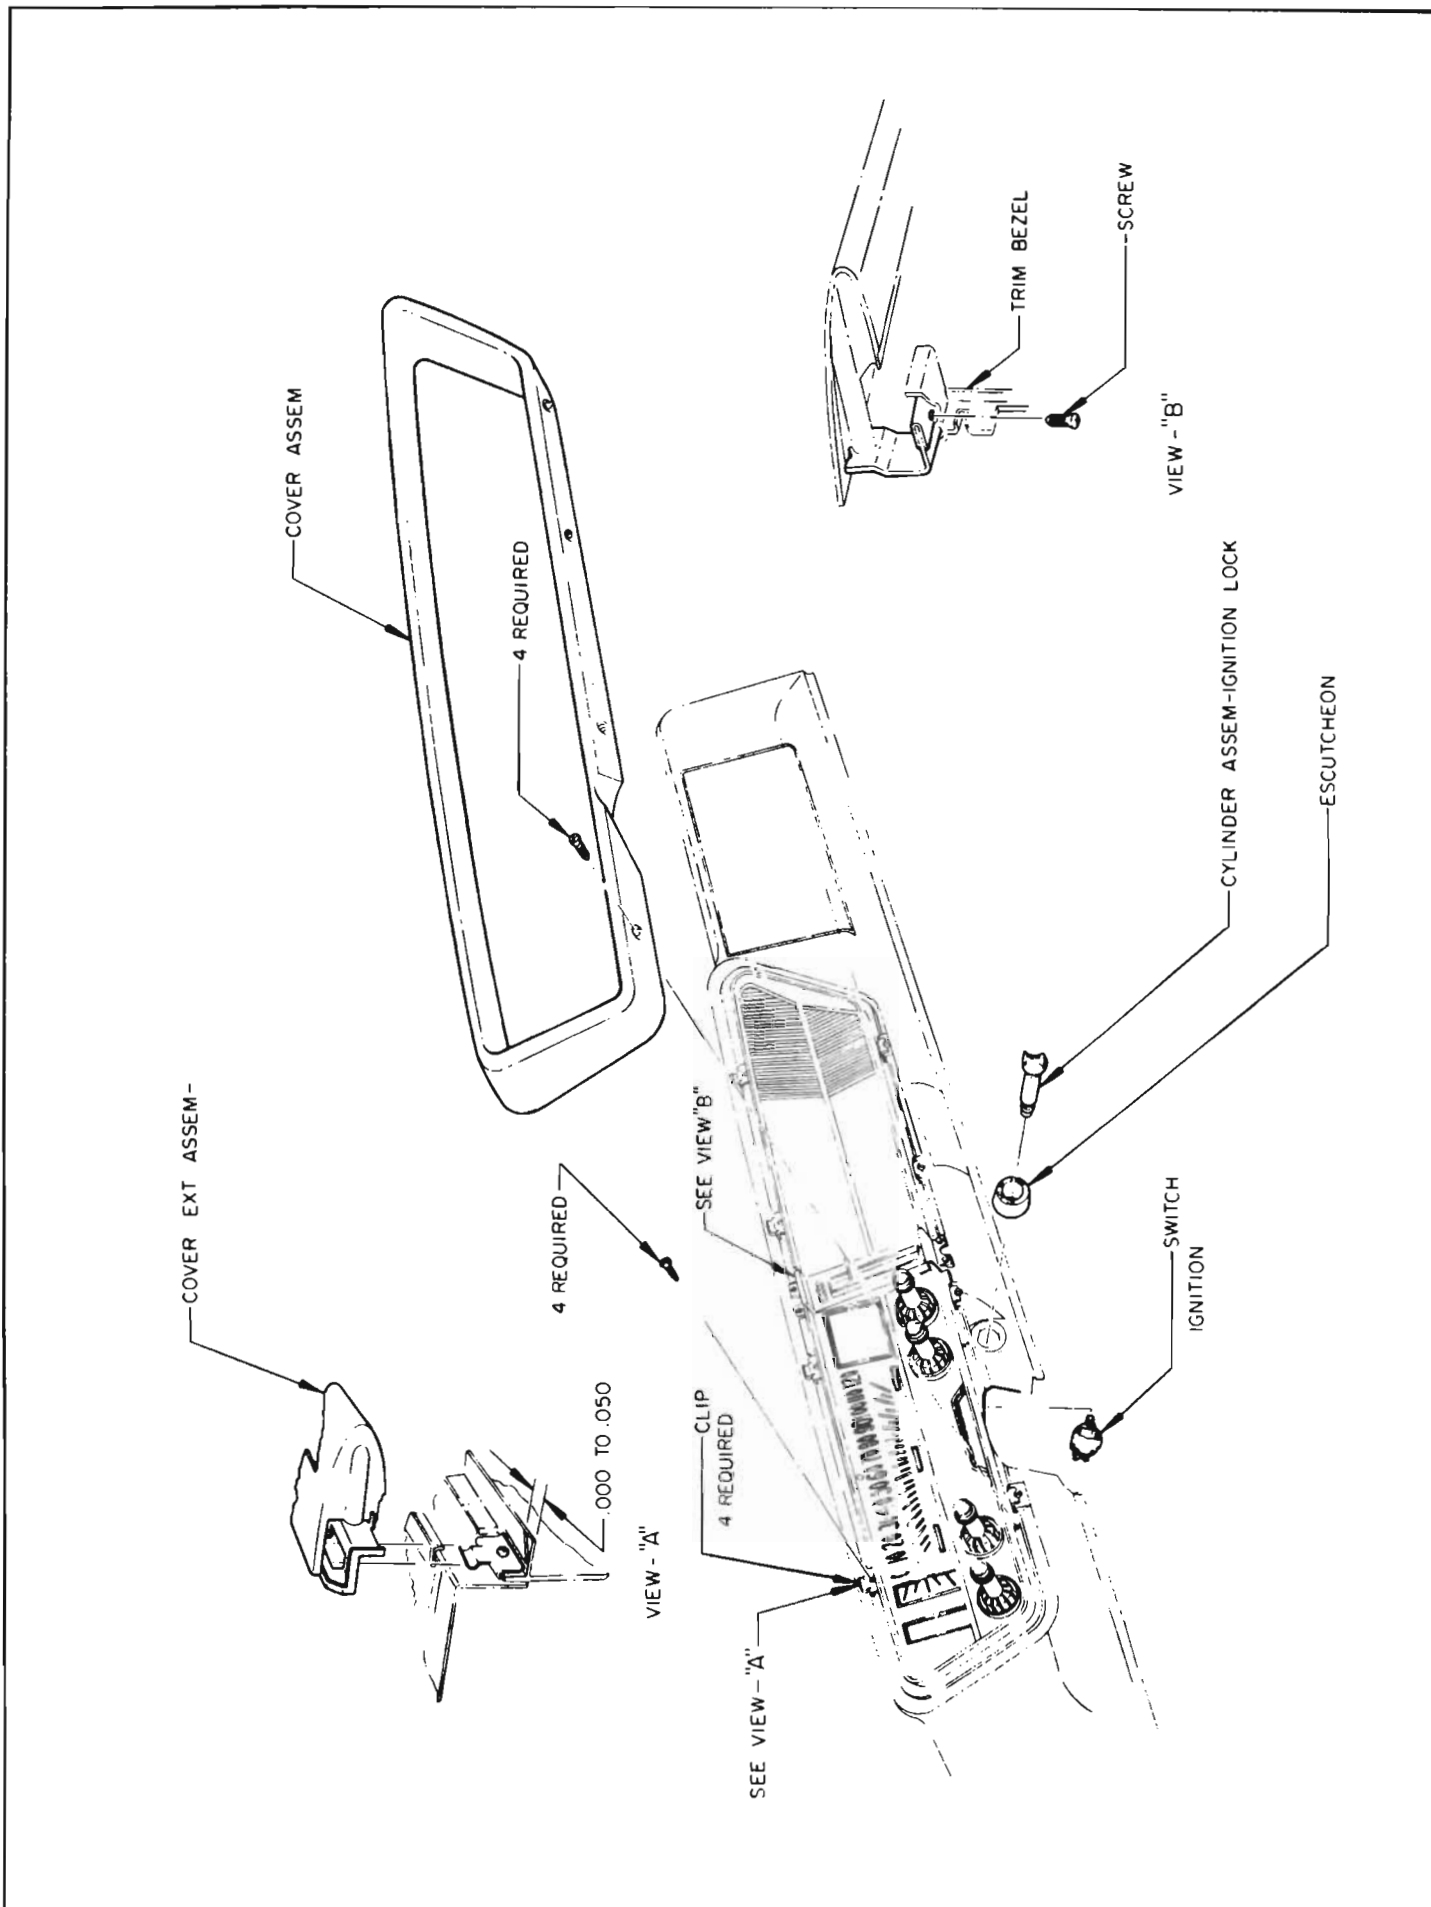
Instrument Panel Cover Extension and Ignition Switch Installation
